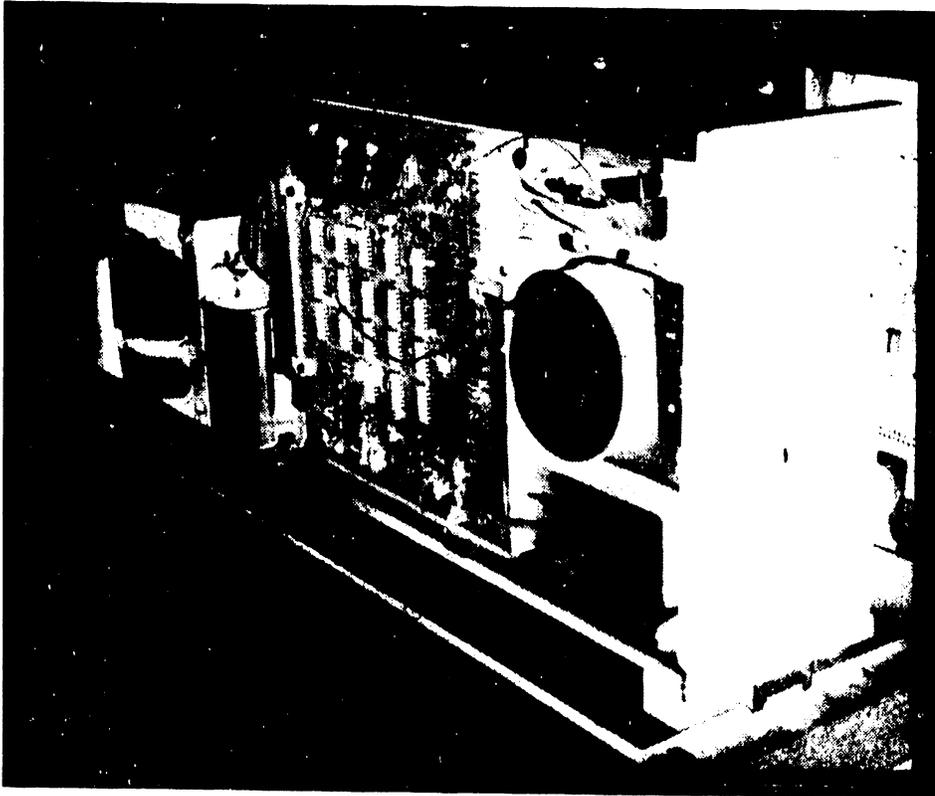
SHUGART DRIVE MOUNTED ON POWER CHASSIS
